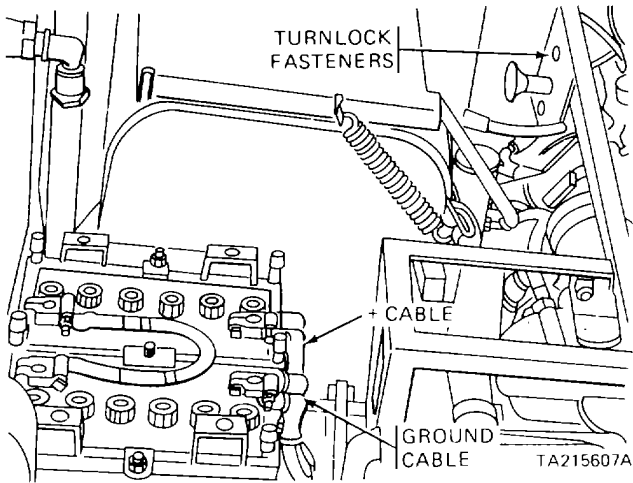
Engine and Transmission Replacement - Battery Cable and Master Switch Removal
